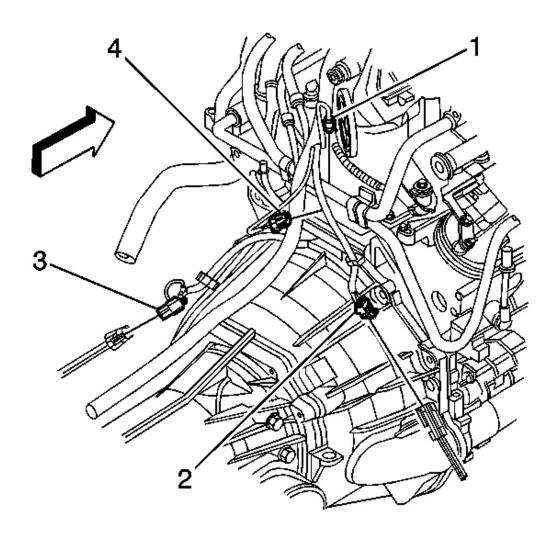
Locating Components Connectors At Rear Of Engine Courtesy of GENERAL MOTORS CORP.
